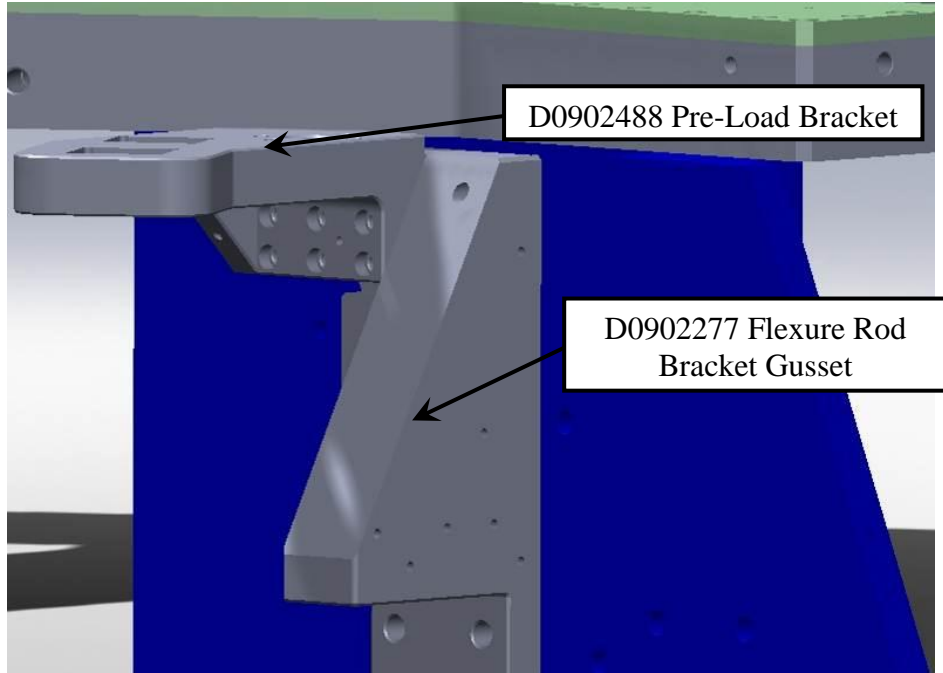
D0902488 Pre-Load Bracket assembled with D0902277 Flexure Rod Bracket Gusset
